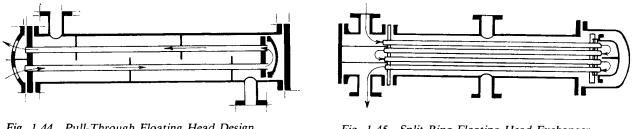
Pull-Through Floating Head Design. (COURTESY OF PATTERSON-KELLEY CO.)
